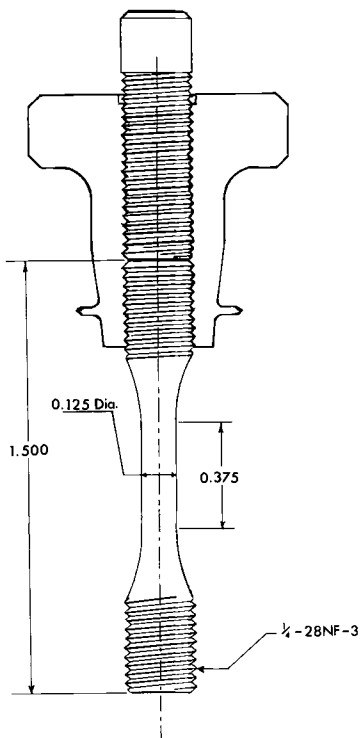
Thread-end specimen and adapter, 1/4-in. diameter.
